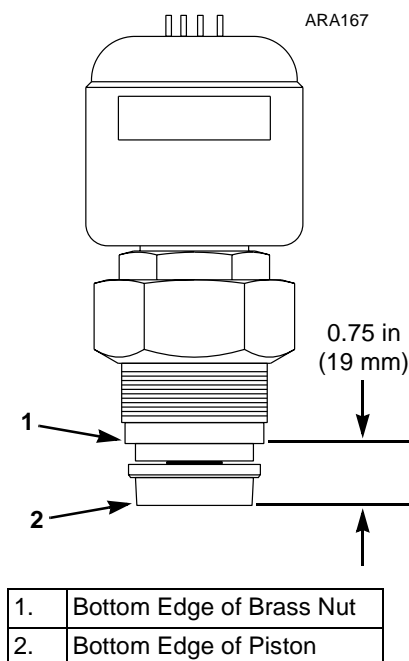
Stepper Motor and Piston Assembly with Piston in Fully Open Position
